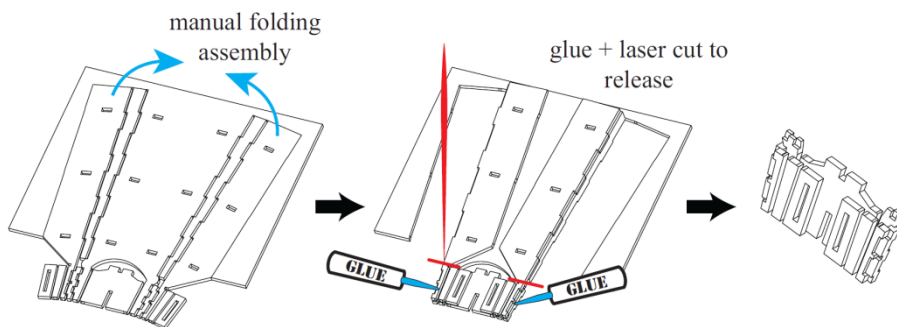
Transmission mechanism fabrication process employed in the SAMB design prototyping. Transmission fabrication includes an auxiliary structure for precision folding; image taken from [97].
